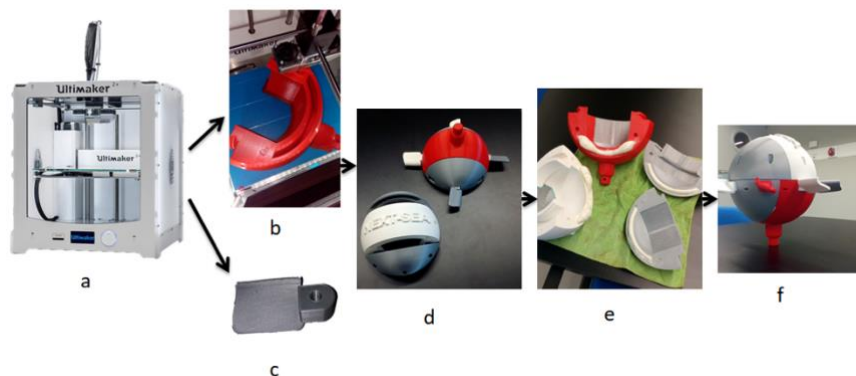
(a) 3d Printer with files to print; (b) fabrication (c) check if the parts fit ; (e) preparation of a set of parts; (f) assemble all parts.
